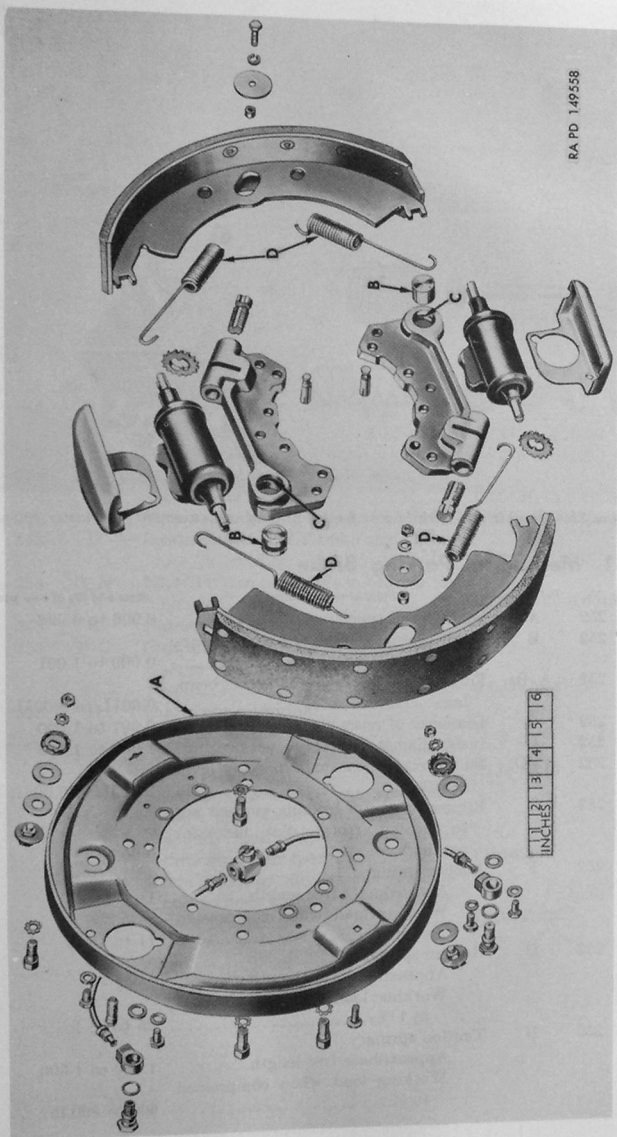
Repair and rebuild standard points of measurement for service brakes.
